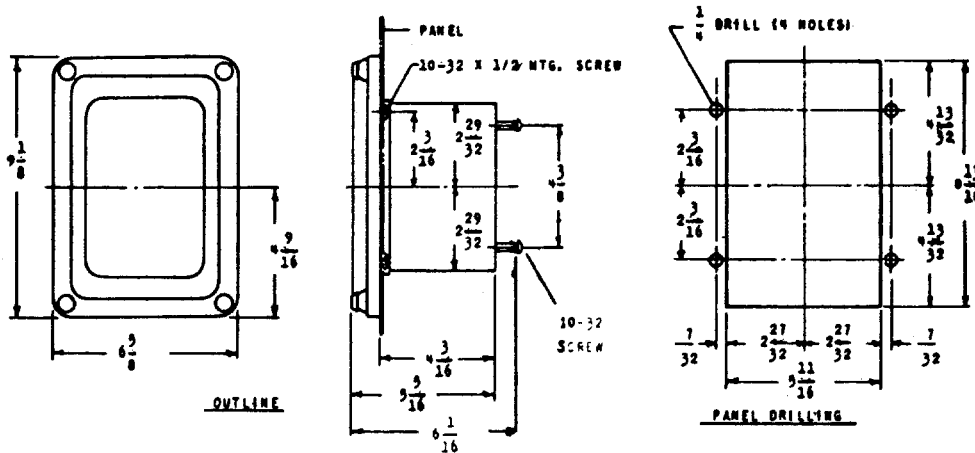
Outline and Panel Drilling Dimensions for Type HFA Relays in "E" Case
